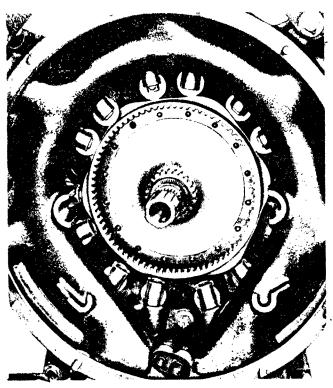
Rear Bearing Spacer and Cam Ring Installed on Tail Shaft
